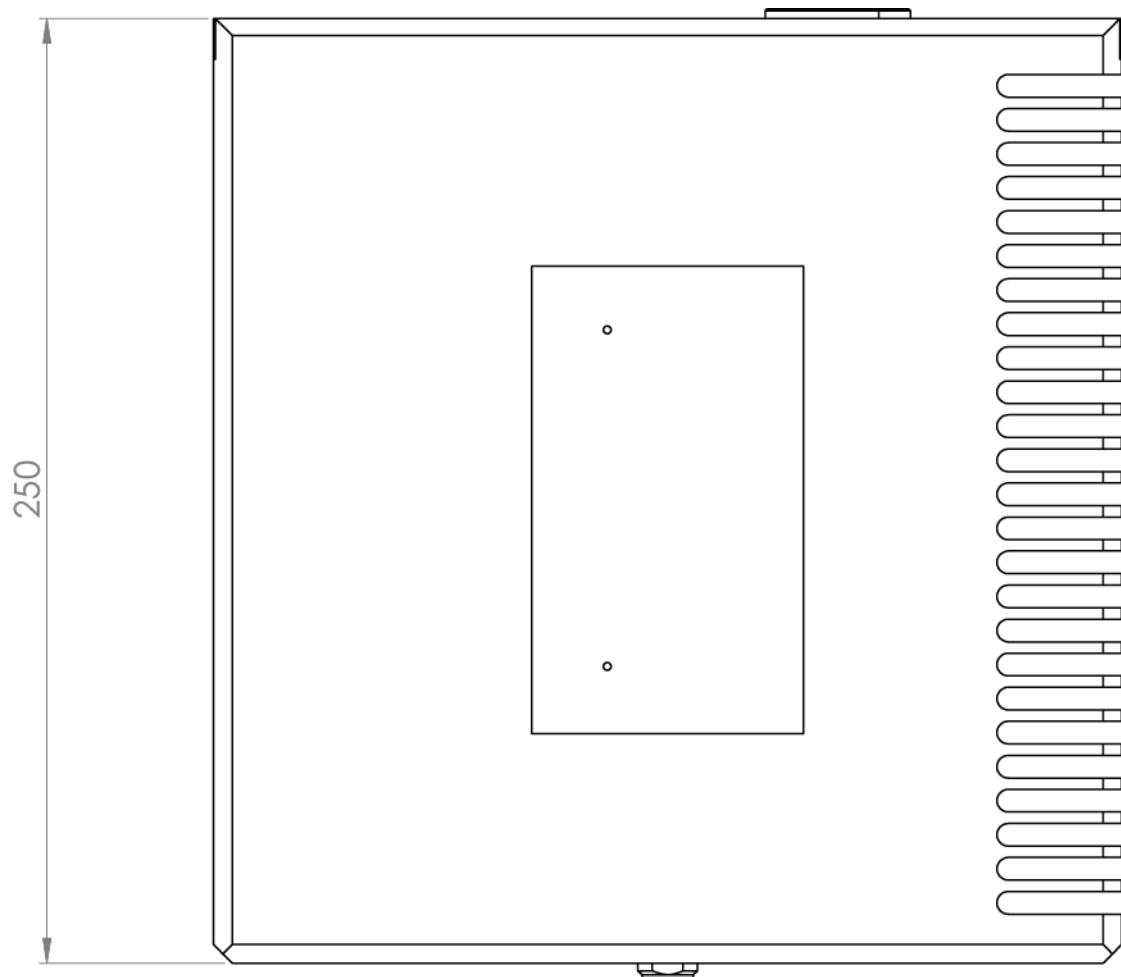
BOTTOM SIDE RF HEAD DETAIL (MEASUREMENT IN CM).
